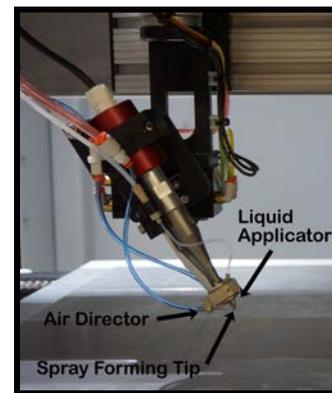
Nozzle-less Ultrasonic Spray Head Assembly
